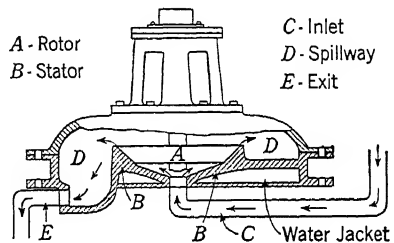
Cross-Sectional View of Liquid Type Mill.
